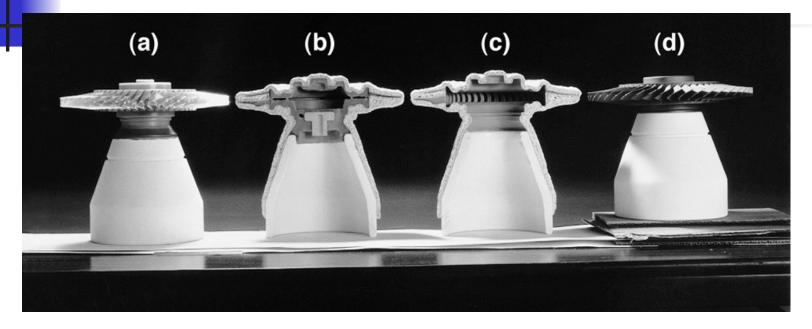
Investment casting of an integrally cast rotor for a gas turbine.
